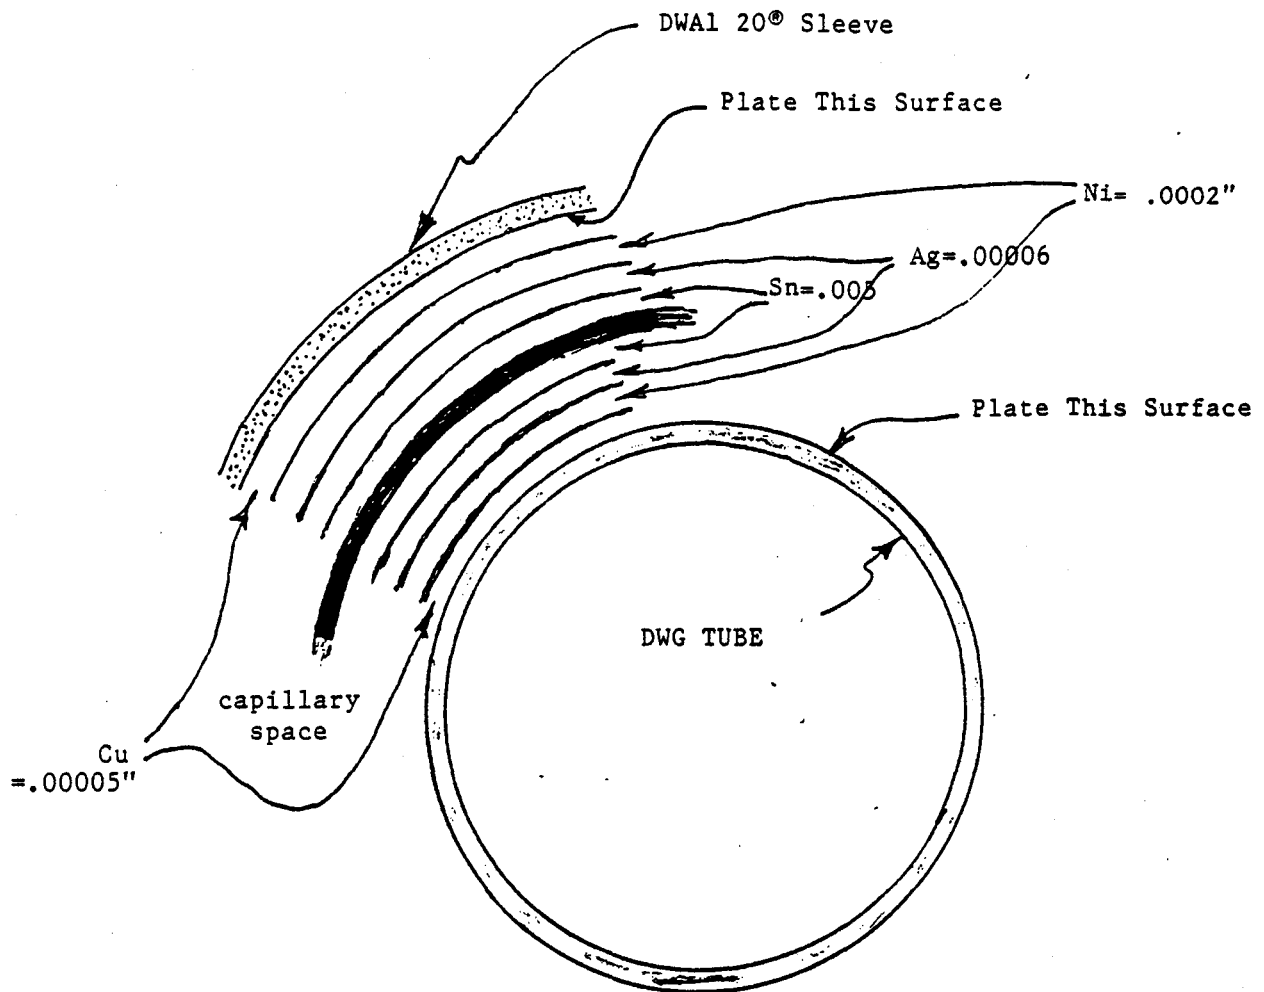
Planned Configuration of Plating for Solder-bonding Tubular Parts
